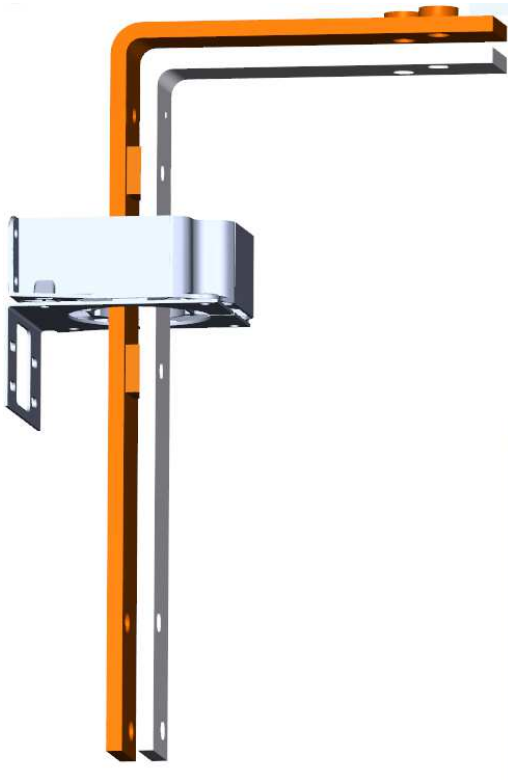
mounting unit stator terminal phase U consisting of transducer (screwed with mounting plate), connection L-busbars, distance adapters and 2x M10-bolts
